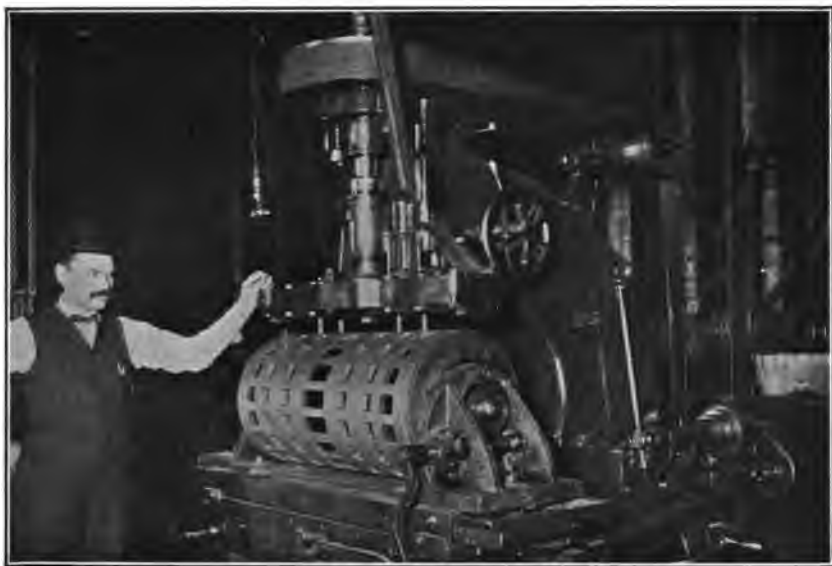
IMPROVED METHOD OF MILLING PORTS OF PISTON-VALVE BUSHINGS. THE MACHINE IS EQUIPPED WITH FOUR MILLING CUTTERS AND THE BUSHING IS MOUNTED ON A MANDREL THAT CAN BE ROTATED BY A HANDLE.
